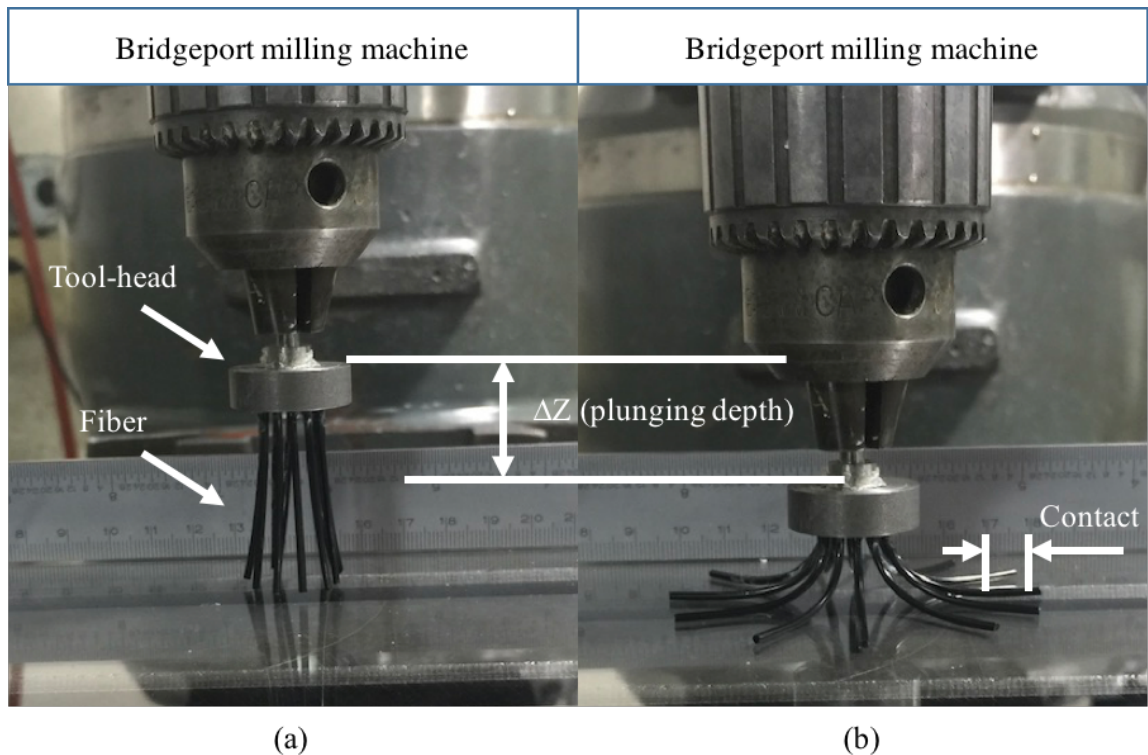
Fiber based tool FT-1 design attached to the Bridgeport milling machine; (a) disengaged, and (b) engaged with workpiece
